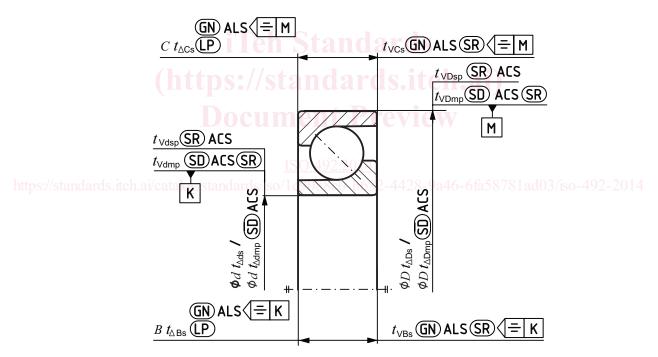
Size specification for single components for bearing with cylindrical bore and symmetrical rings
